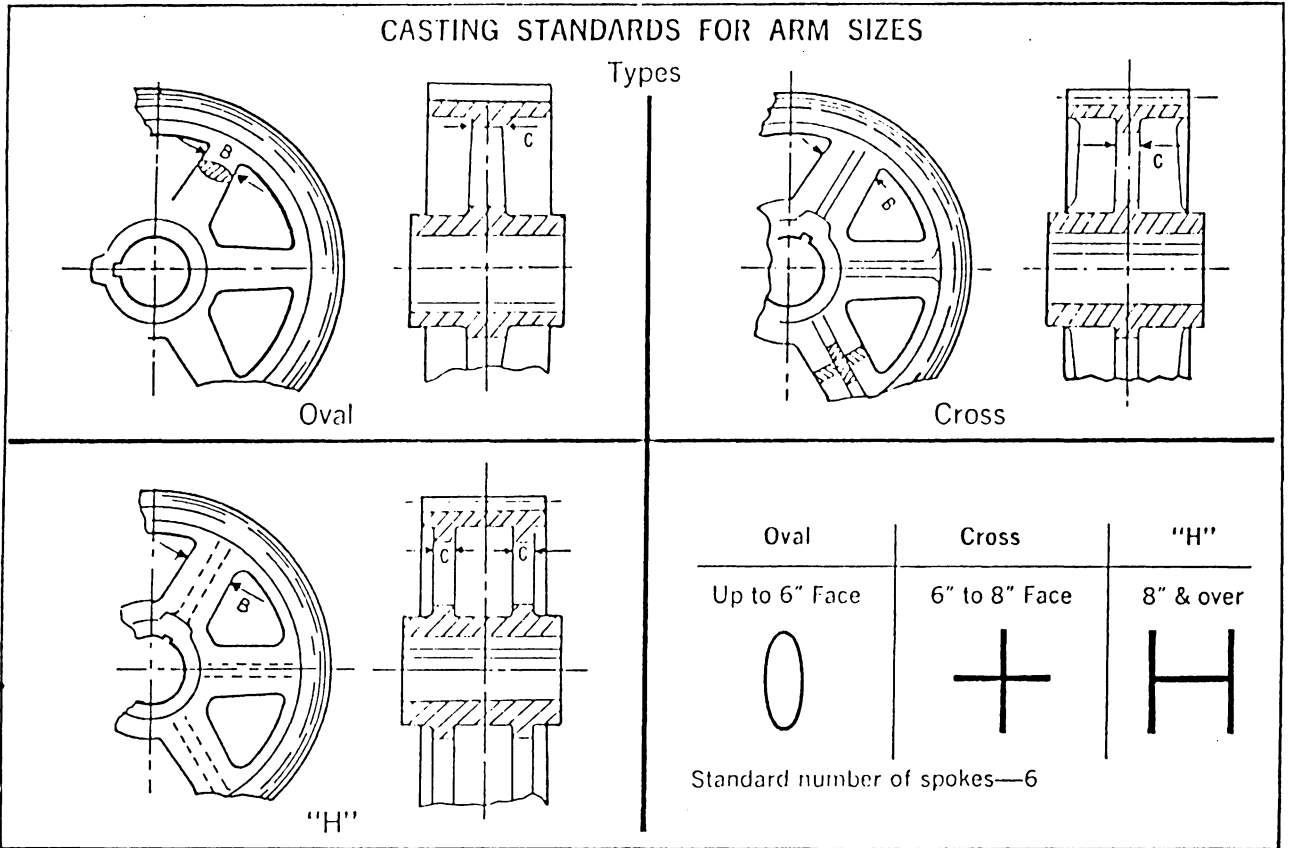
Changes in the Geometry of a Spoked Gear Blank [11]
